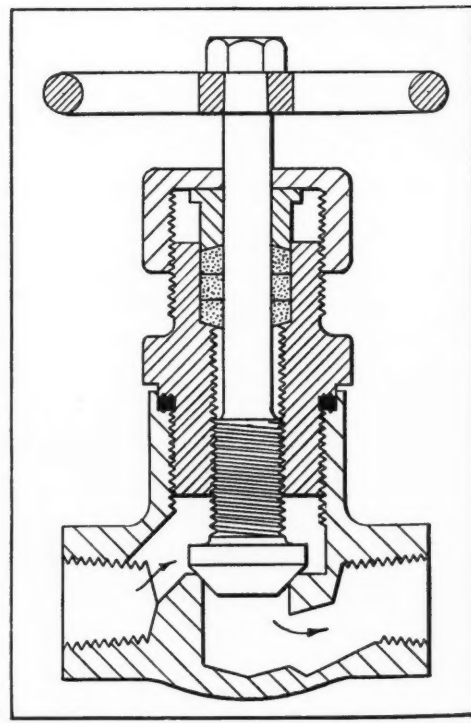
(Right) Globe valves, used in circuits where passages are opened and closed often, have balls or disks that fit the valve seats to open or close the passage
